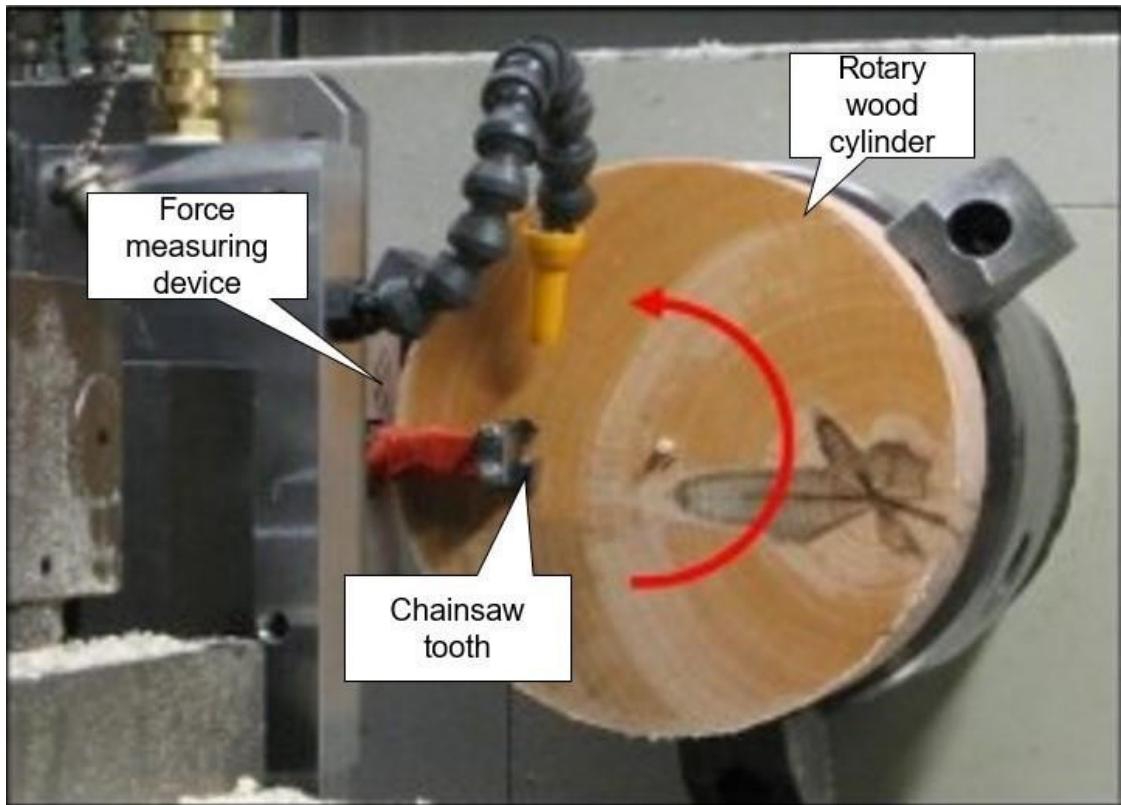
View of the experimental setup used to determine the cutting forces acting on a single chainsaw tooth
